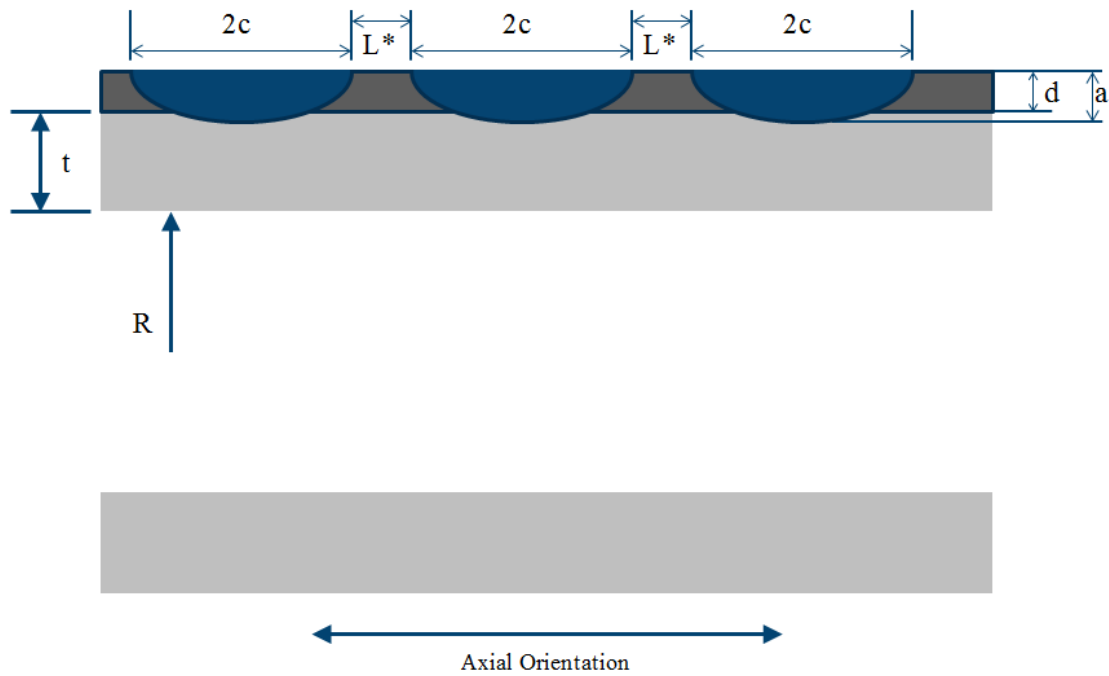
2D Planar Sketch of Multiple, Axial, Elliptical, Part Through-Wall Cracks on OD
